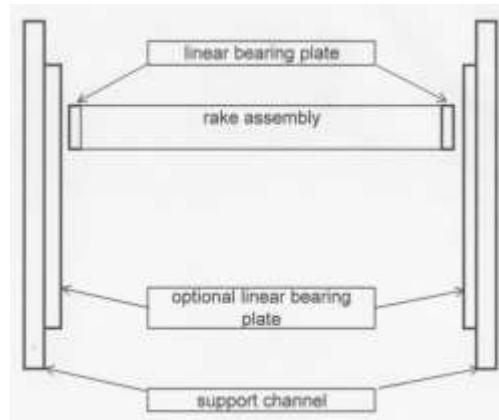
AN EXAMPLE OF LINEAR BEARING PLATES USED ON A RAKE ASSEMBLY.
